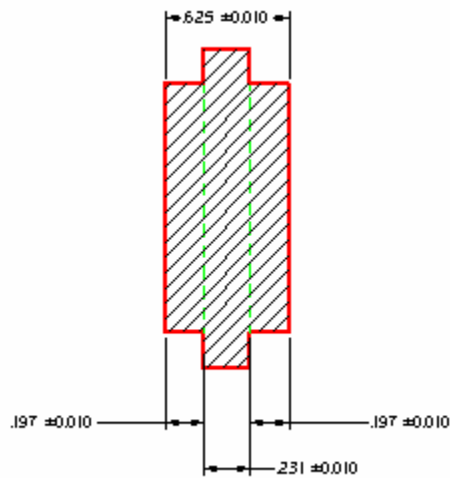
Dimension of carbon steel test piece (Unit: Inch)
